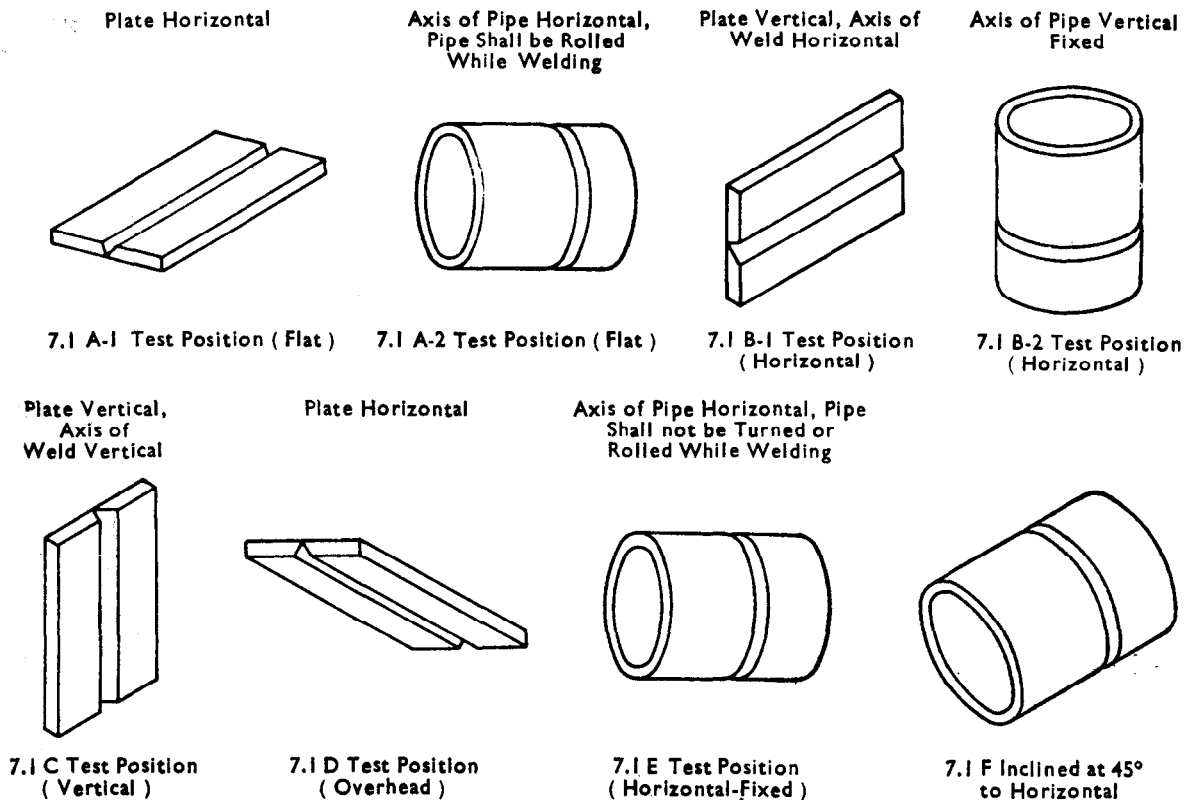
POSITIONS OF TEST PLATES OR PIPES FOR WELDER QUALIFICATION AND PERFORMANCE OF BUTT WELDS
